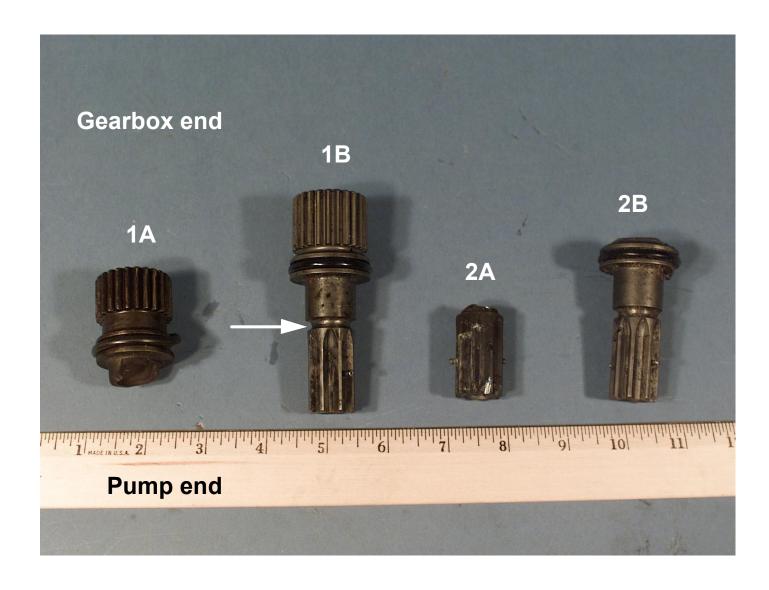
Overall view of the hydraulic pump drive shaft pieces. The unlabeled arrow indicates the reduced section shear point for the 1B shaft.
